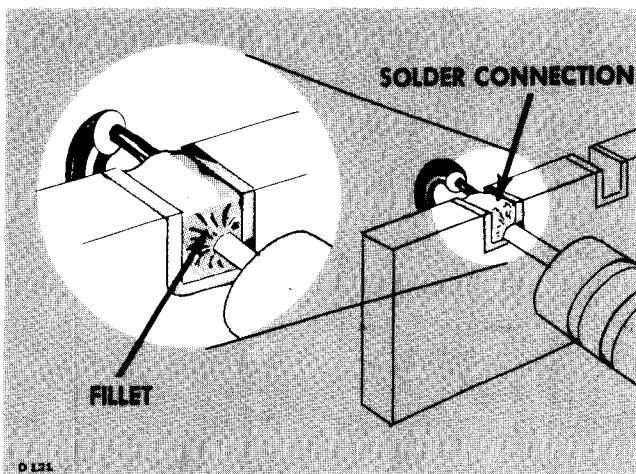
A slight fillet of solder is formed around the wire when heat is applied correctly.
